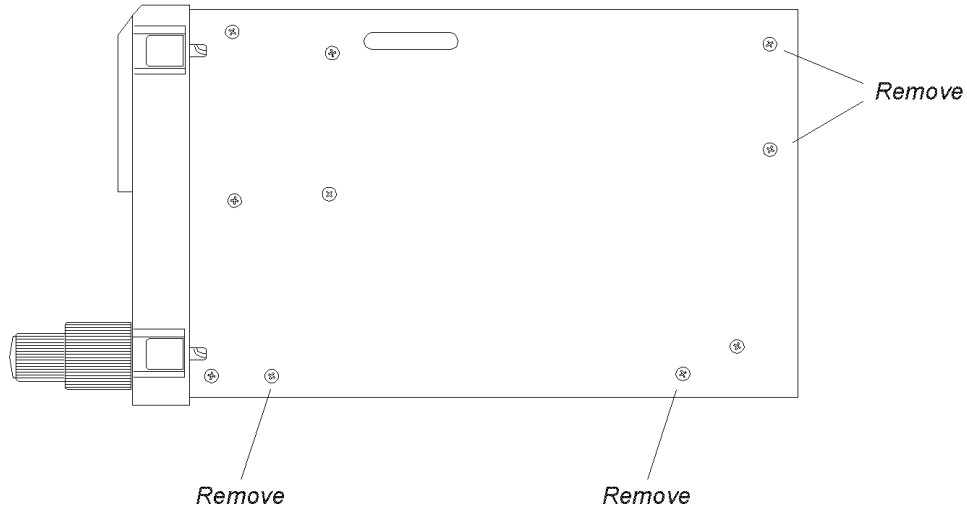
Screw Locations to Remove C-5000 Bottom Cover
